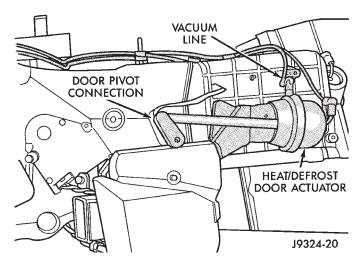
Heat/Defrost Door Vacuum Actuator Remove/Install
